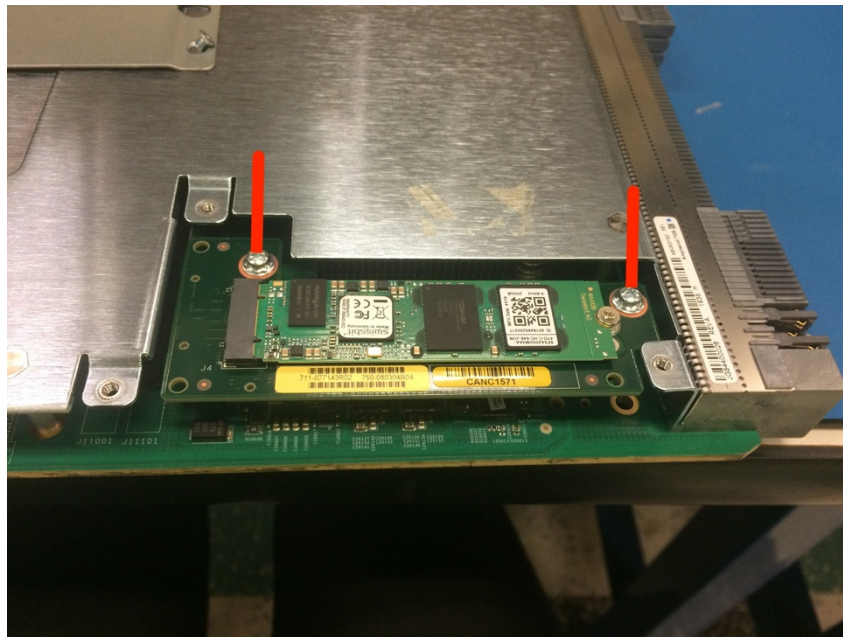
RE-S-1800 Top View Showing SSD Bays and Compact Flash
